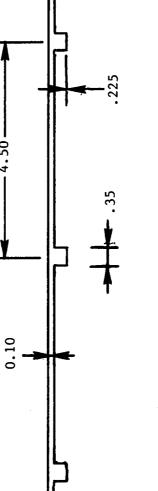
Geometric details of the shell wall (dimensions in inches).
